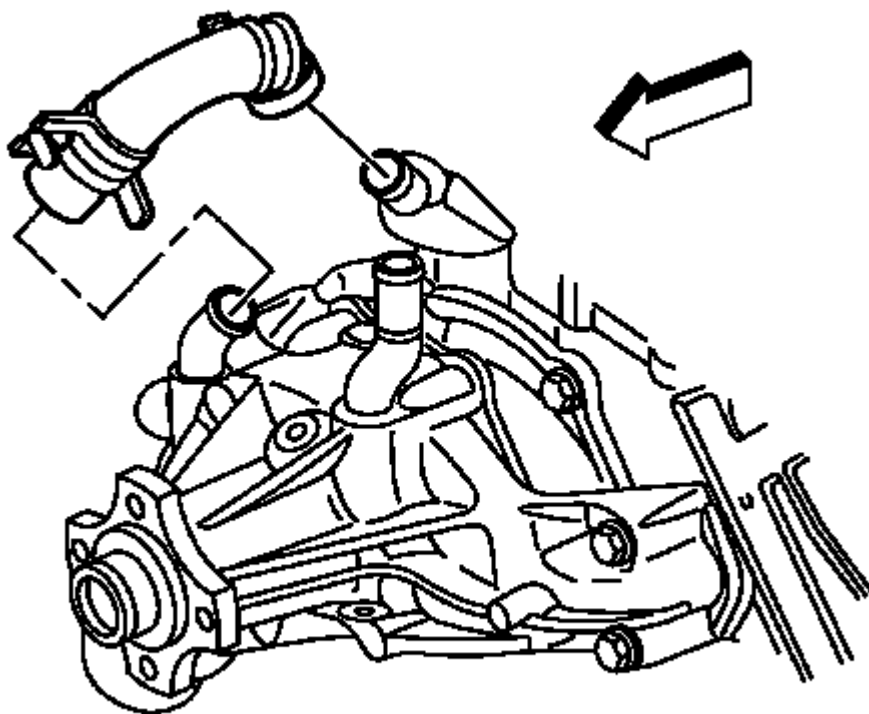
View Of Water Pump Inlet Hose & Clamps
